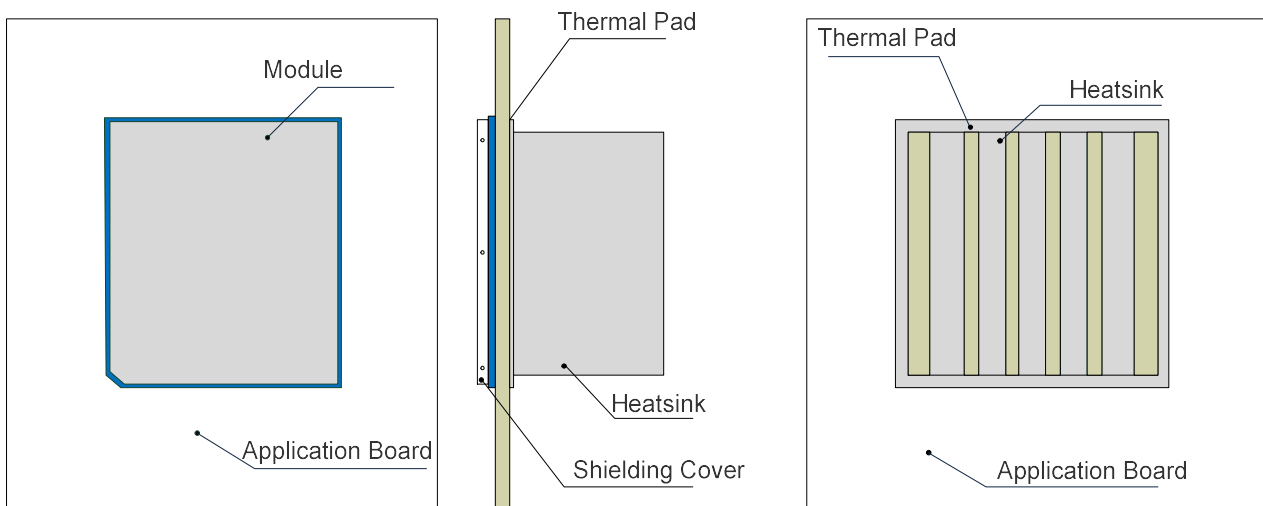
Referenced Heatsink Design (Heatsink at the Backside of Customers' PCB)
